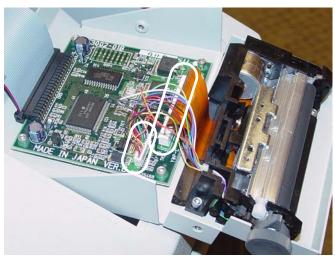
Remove the Printer Ribbon Cable and the Printer Data Cable
